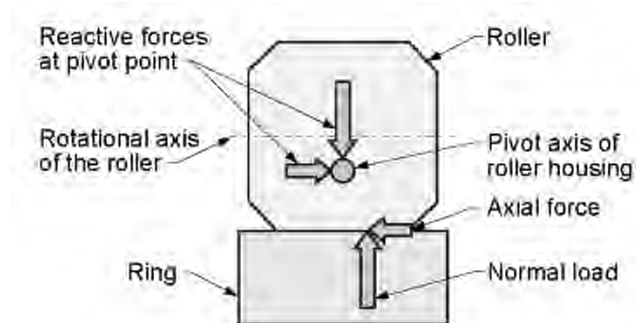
Schematic of the SARJ roller and ring in contact, front view in cross-section.
